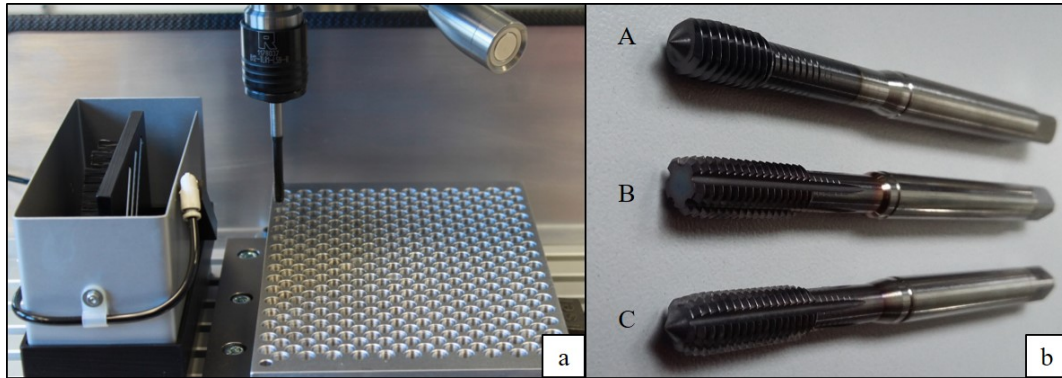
a: Tapping machine, tapping tool, pre-drilled test platform and cleaning station of the tribometer used for tapping torque tests (Rhenus Lub, Germany). b: Different tapping tools for thread forming used in the tests
